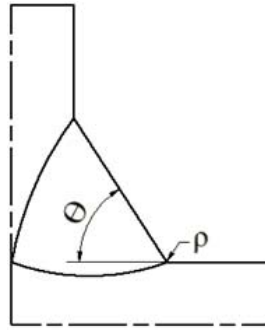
Parameters used to characterize the weld toe geometry.
